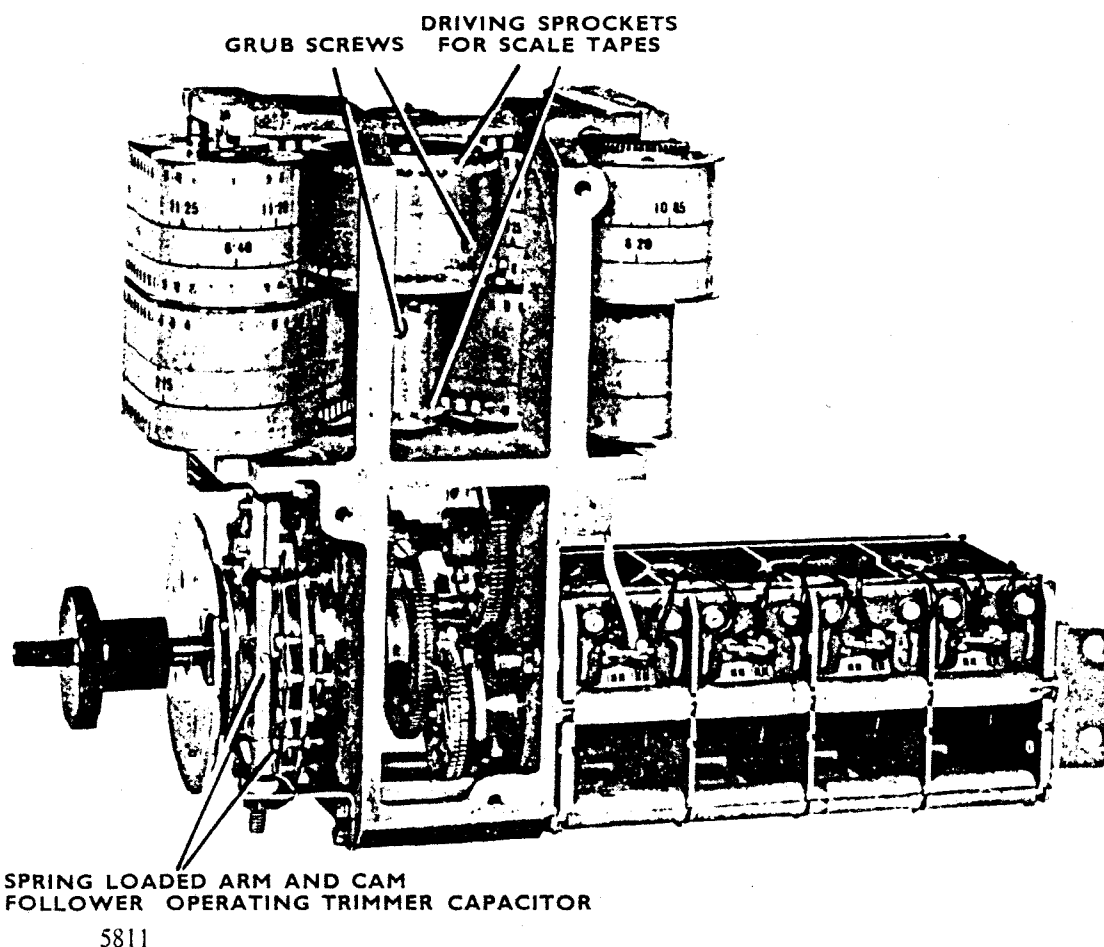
TUNING CAPACITOR AND SCALE DRIVE ASSEMBLY. RIGHT HAND SIDE
